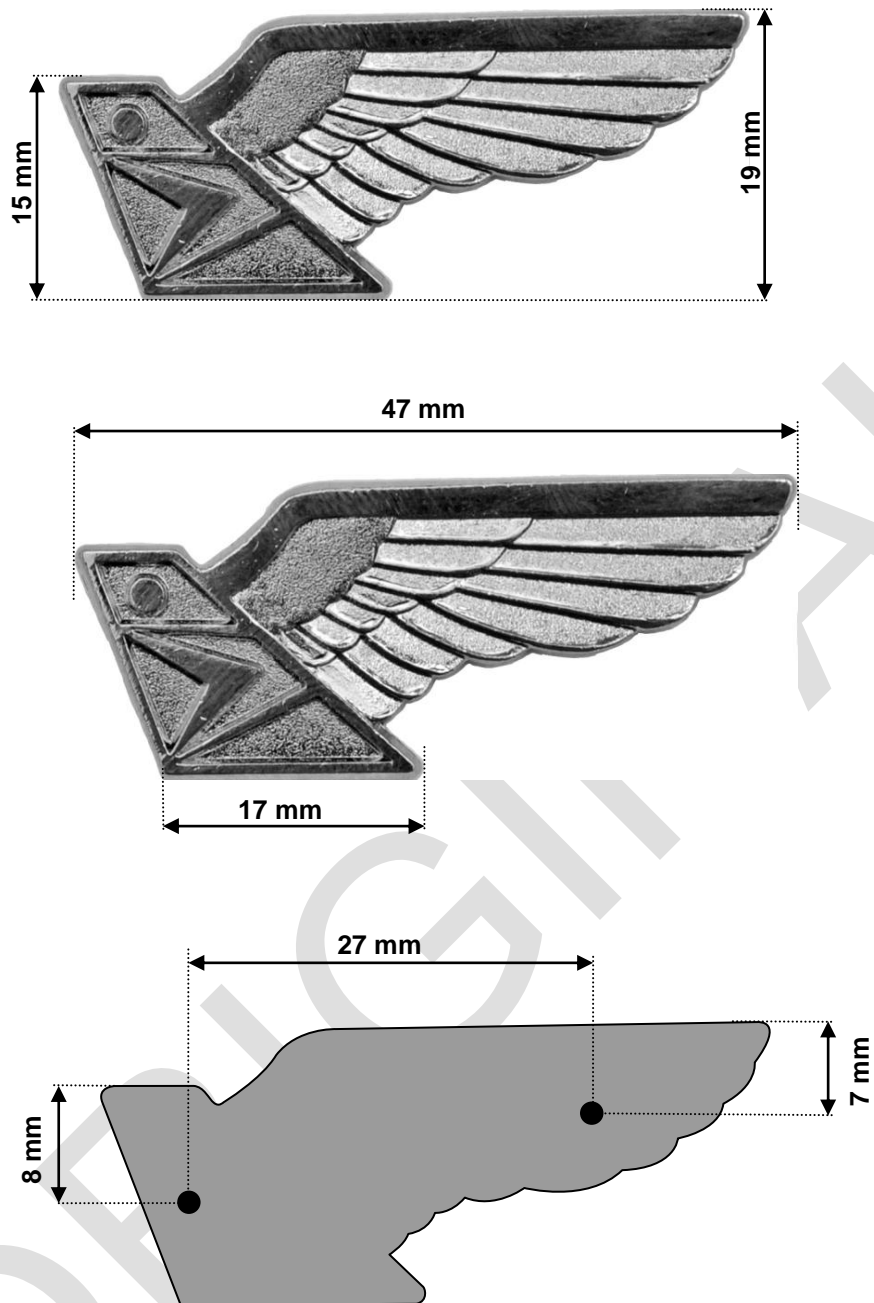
Dimensions of the Cabin crew badge, Half wing
